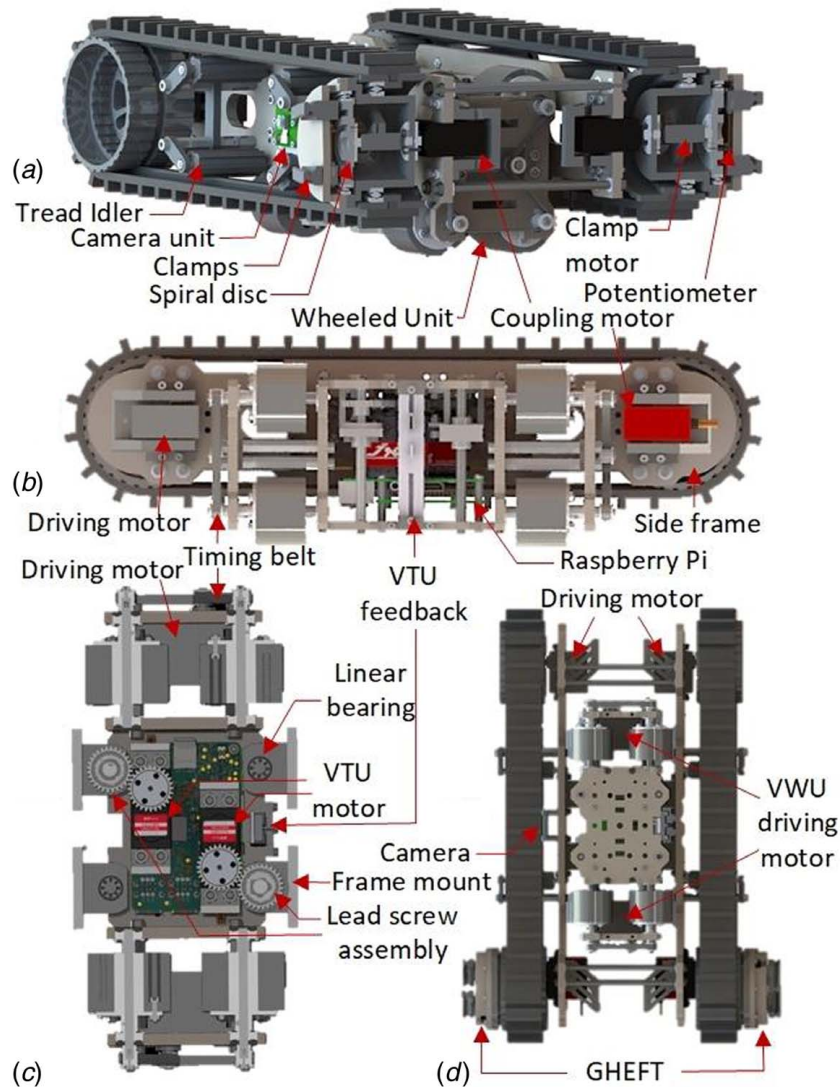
Computer-aided design (CAD) illustration of the STORM robot: (a) isometric cut-section view of the front side showing the inner side of the GHEFT mechanism, (b) the side cut-section representing Vertical Translation unit (VTU) and the wheeled assembly of the robot, (c) the architecture of the VTU exposing the dual actuation of the lead-screw assembly, and (d) top view of the robot showing the overall actuating positions of the robot
